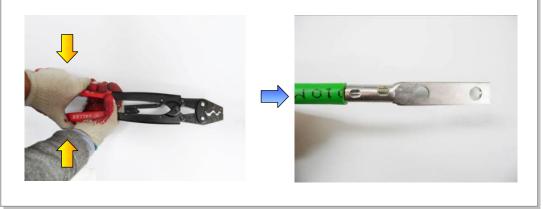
Fixing Pressure Terminal_Handheld Compressor (2)
